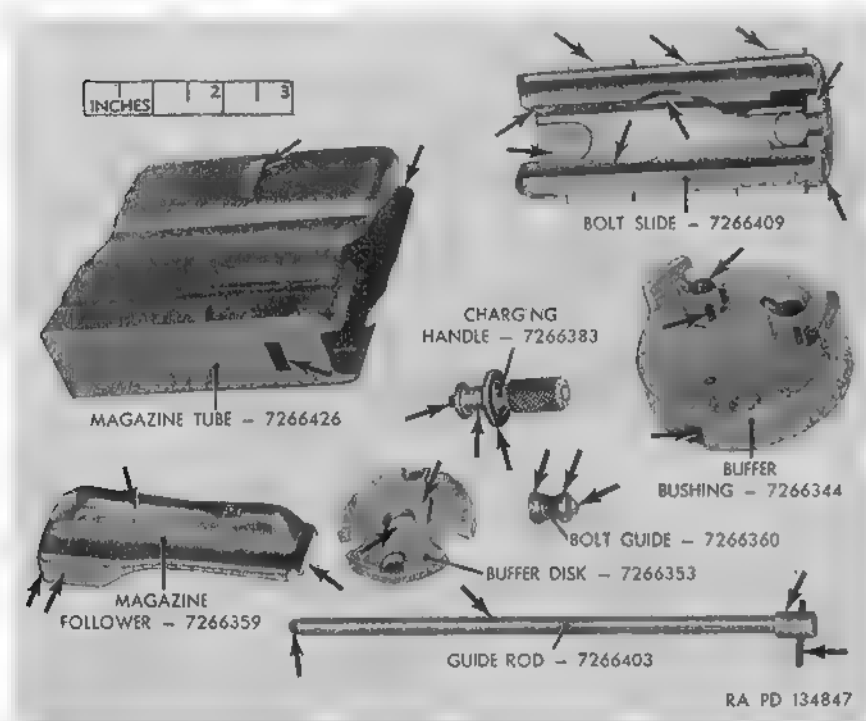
Bolt slide and magazine group parts—important points to inspect.
